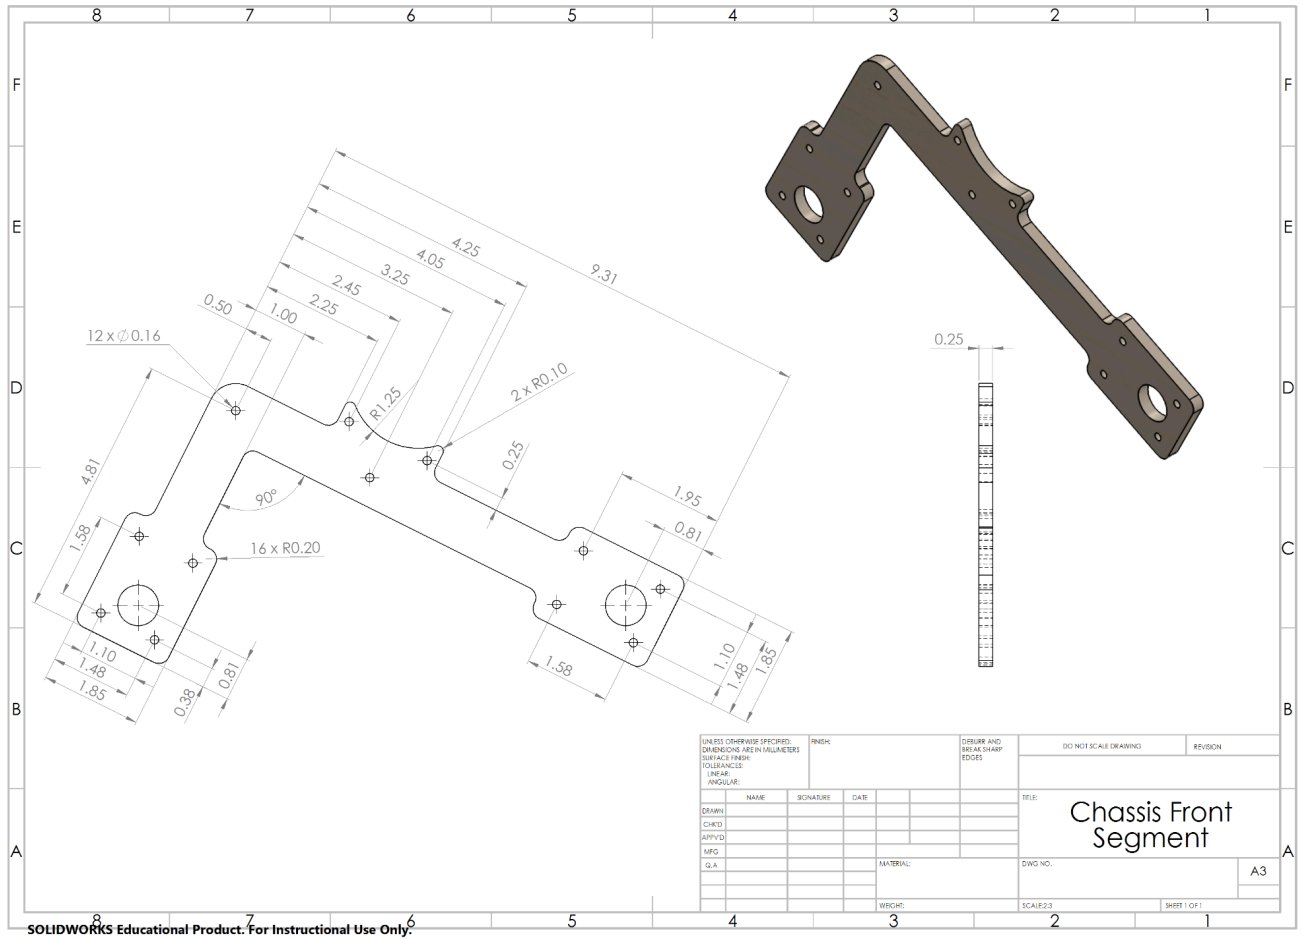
SolidWorks Drawing of Chassis Front Segment (Laser Cut)
